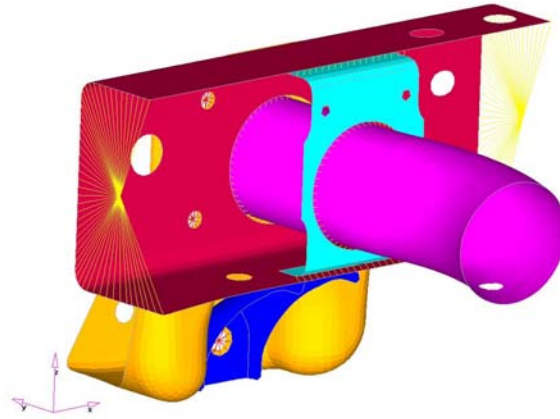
Joint 3: Tube Through Partially Boxed Section (welded on both sides)
